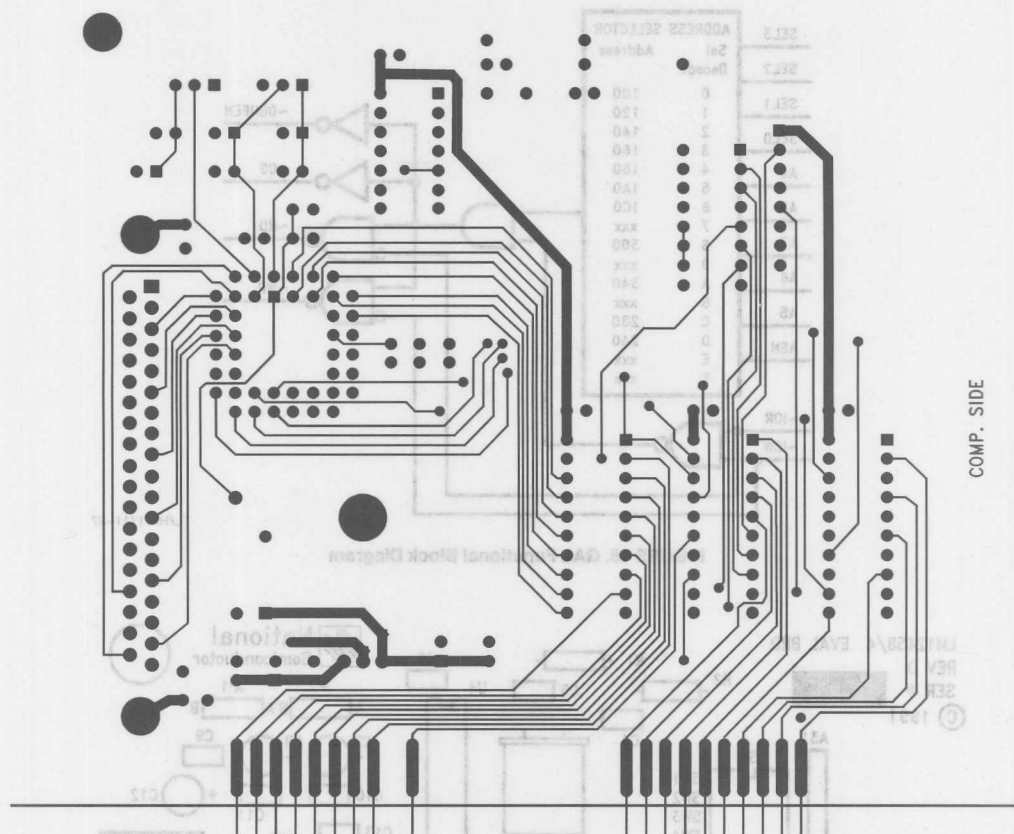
LM12(H)454/8 Evaluation/Interface Board Component-Side Layout Positive
